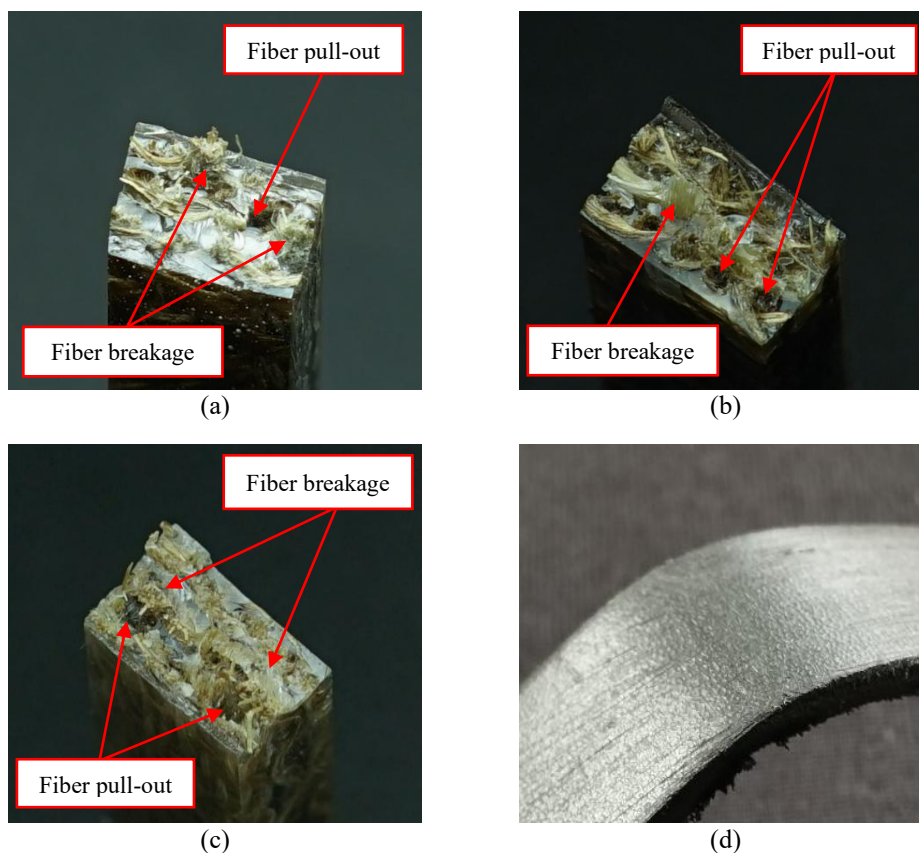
Fracture of bending test specimen (a) plain; (b) twill; (c) basket; (d) car bumper
